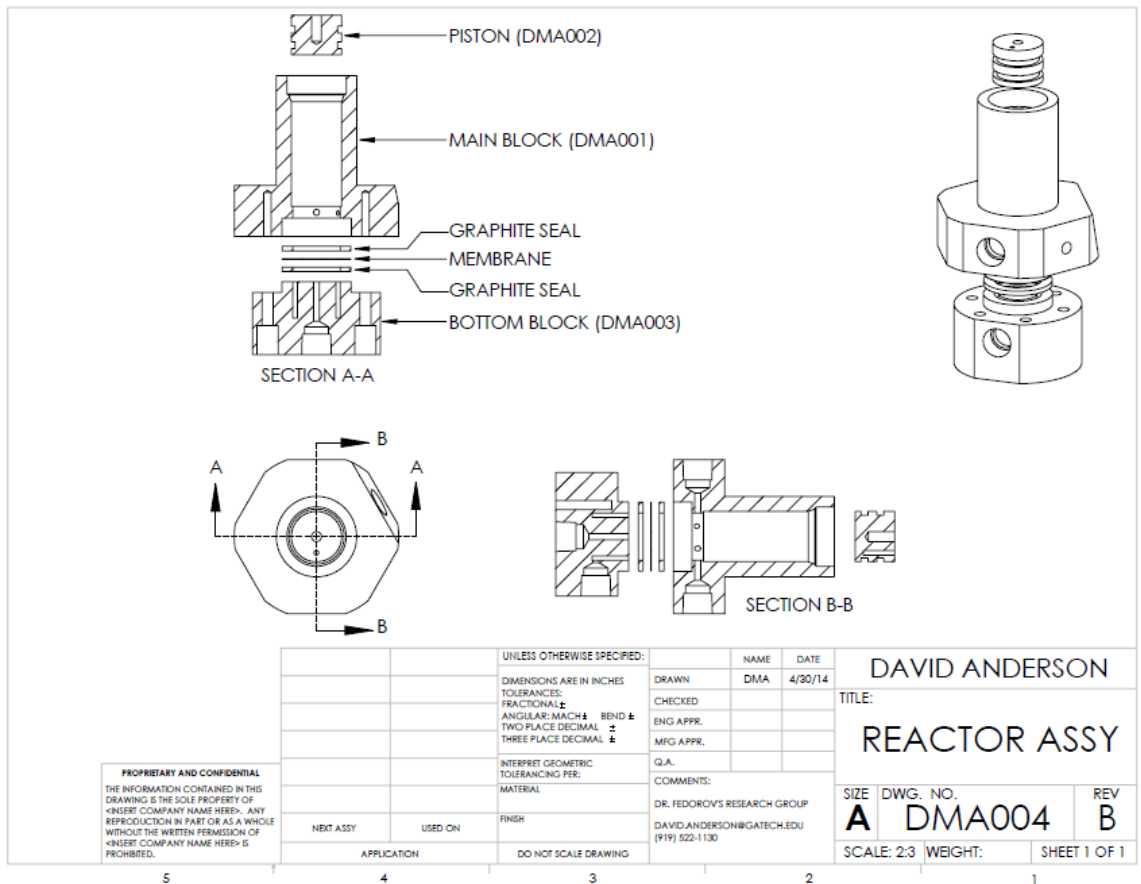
CHAMP-SORB Reactor Assembly Drawing
